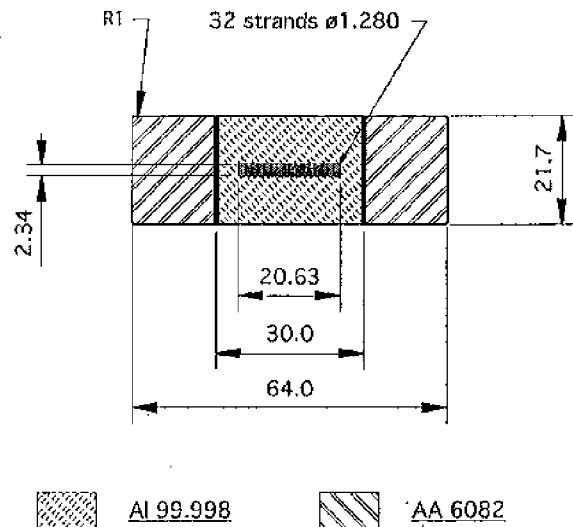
Cross section of the CMS conductor. One can note the two aluminium alloy sections welded by Electron Beam welding technique to the pure aluminium stabilizer.
